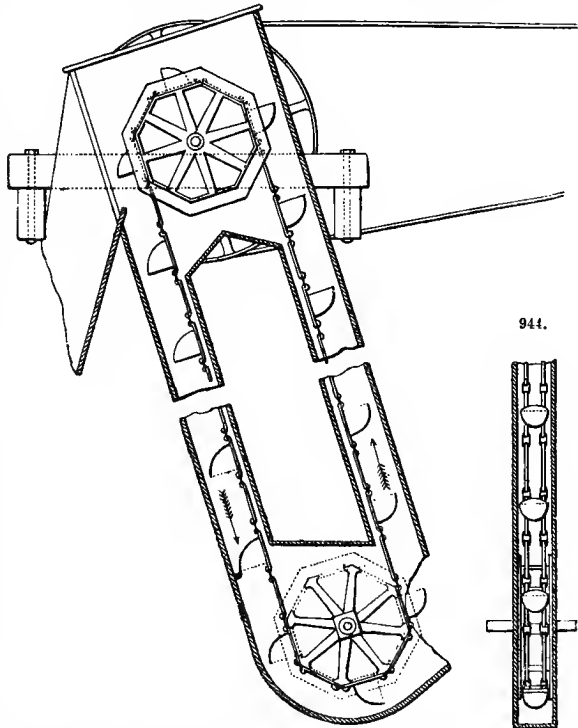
shows a front view of the buckets, with a portion of the casing removed. The requisite parts are two octagonal pulleys, cost about 2*l.*; double wrought-iron chain, about 1*s.* a foot; plate-iron buckets, with steel mouth-pieces, each 2*s.* 9*d.*; and bolts and nuts for ditto, about 1*s.* 3*d.* a doz. As the pitch of the chain is  $8\frac{1}{2}$  in., and every alternate link carries a bucket, there will be one bucket required for every  $16\frac{1}{2}$  in. of chain, and 2 bolts and nuts to each bucket. The elevator drum should travel at about 20 rev. a minute.
